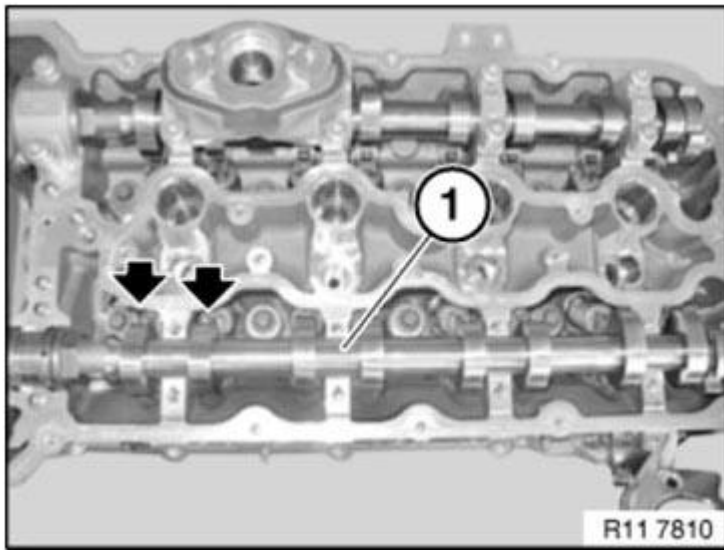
Positioning Inlet Camshaft So That Cams Point To Side At Cylinder 5
